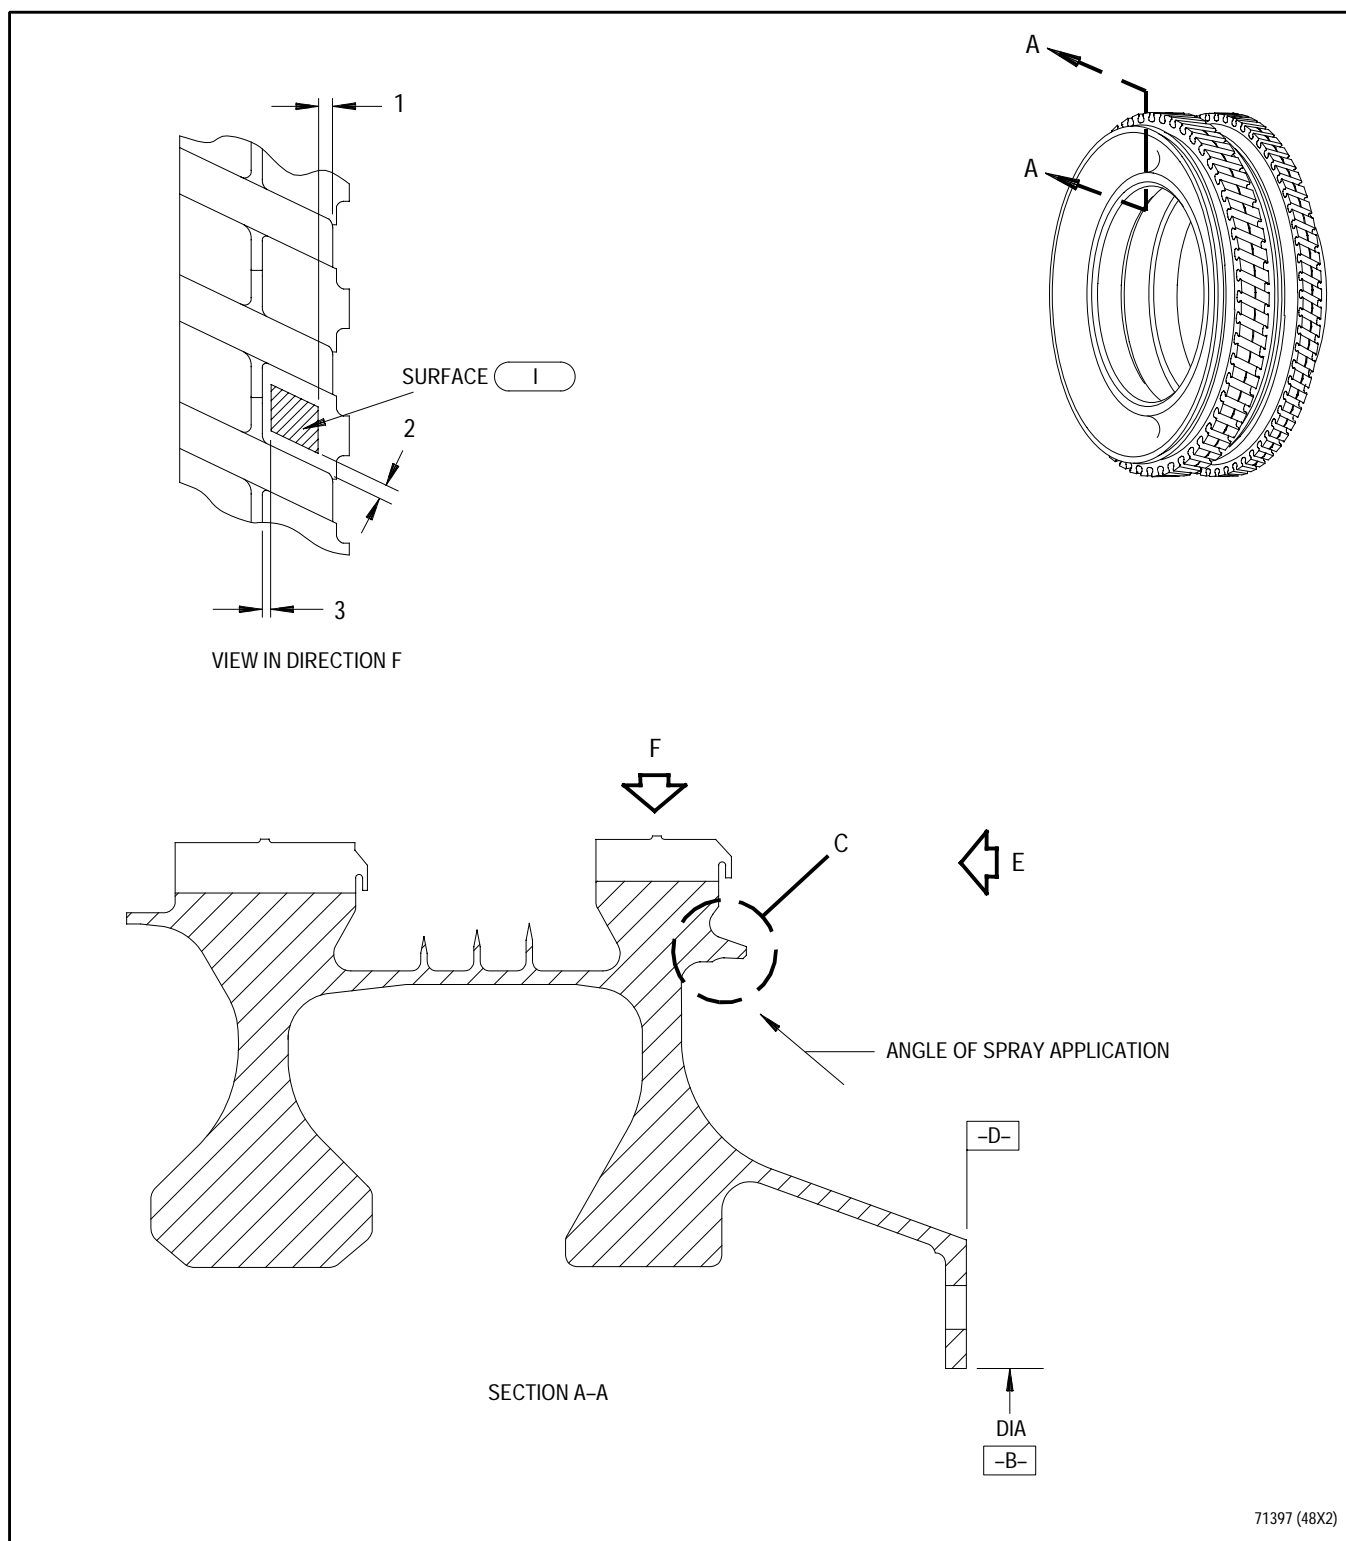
Rear Compressor Front Disk-Drum Rotor Assembly - Snap Diameter Plasma Coat Repair
